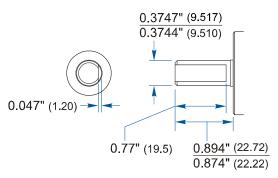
Servo Mount, Side Connector Outline Drawing
